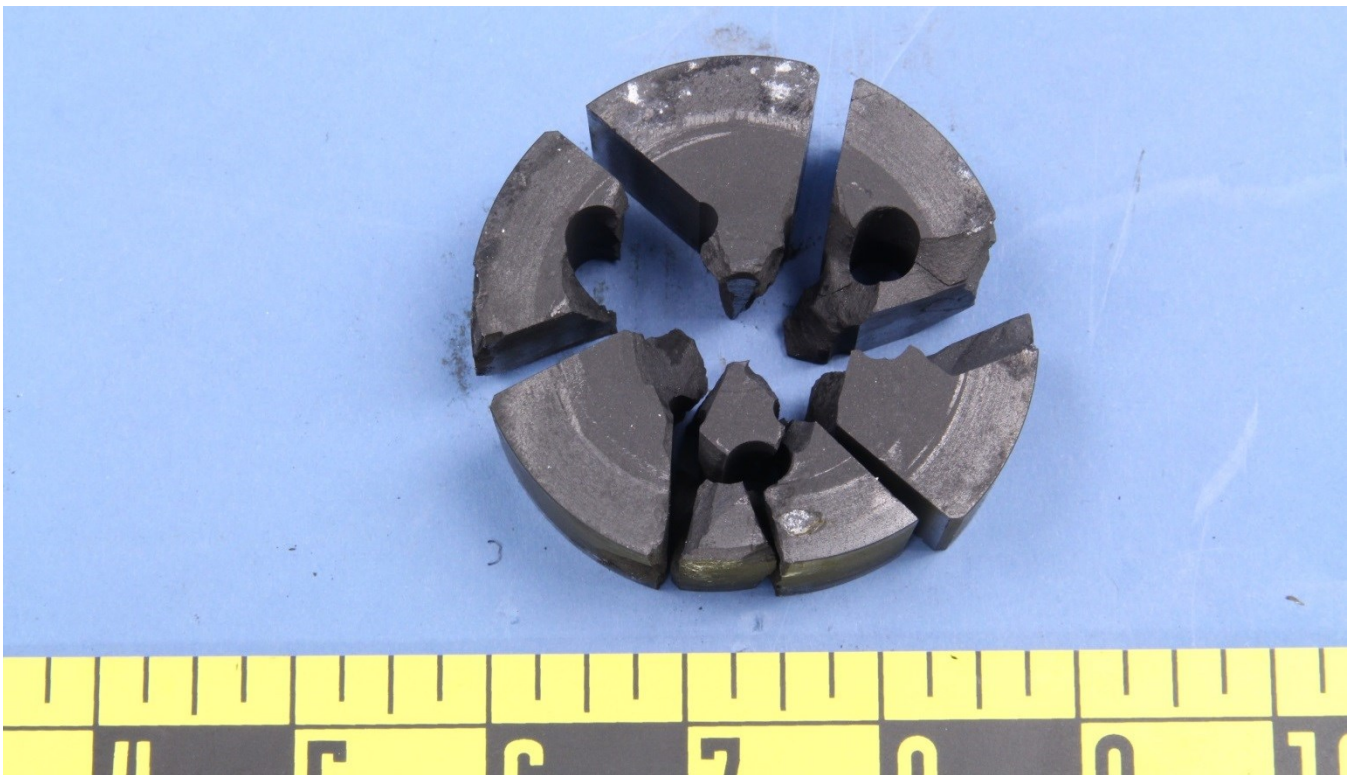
The fractured rotor pieces, after removal from the pump housing, opposite side of that Figure 4.
